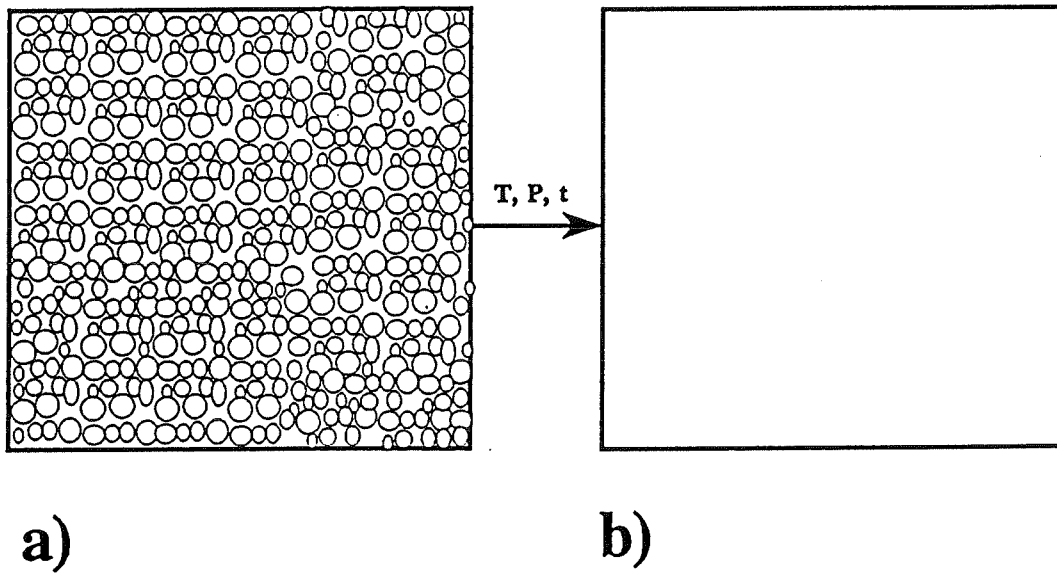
Compression molding of PS pellets⁴³ - a) before molding, b) after molding
